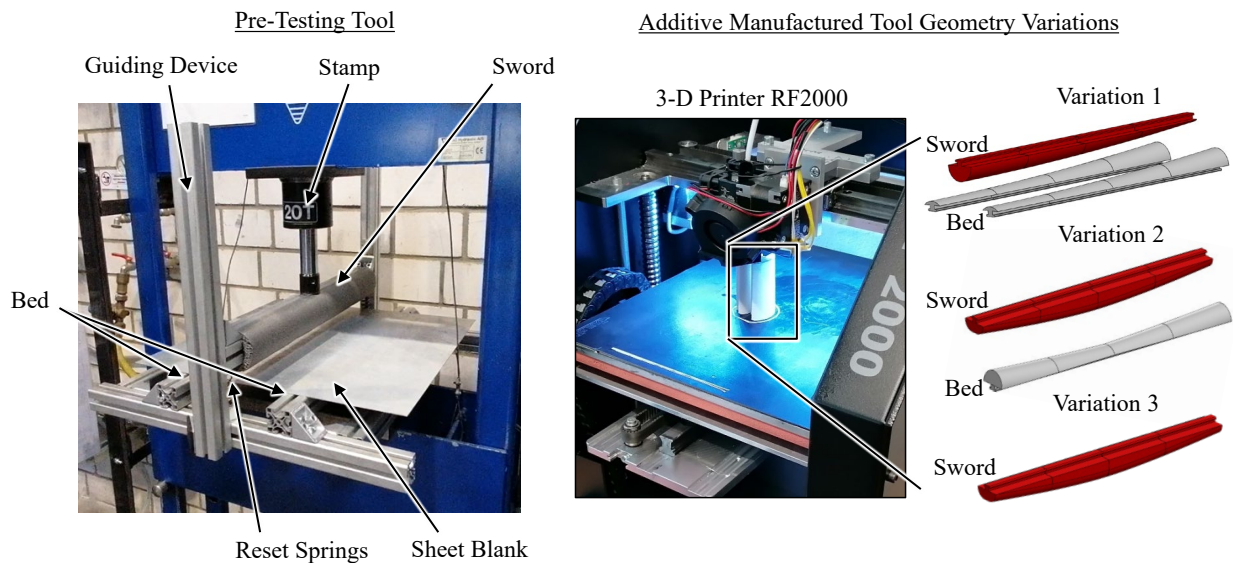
Pre - testing tool (left), additive manufacturing of tools for spherical forming (right)
